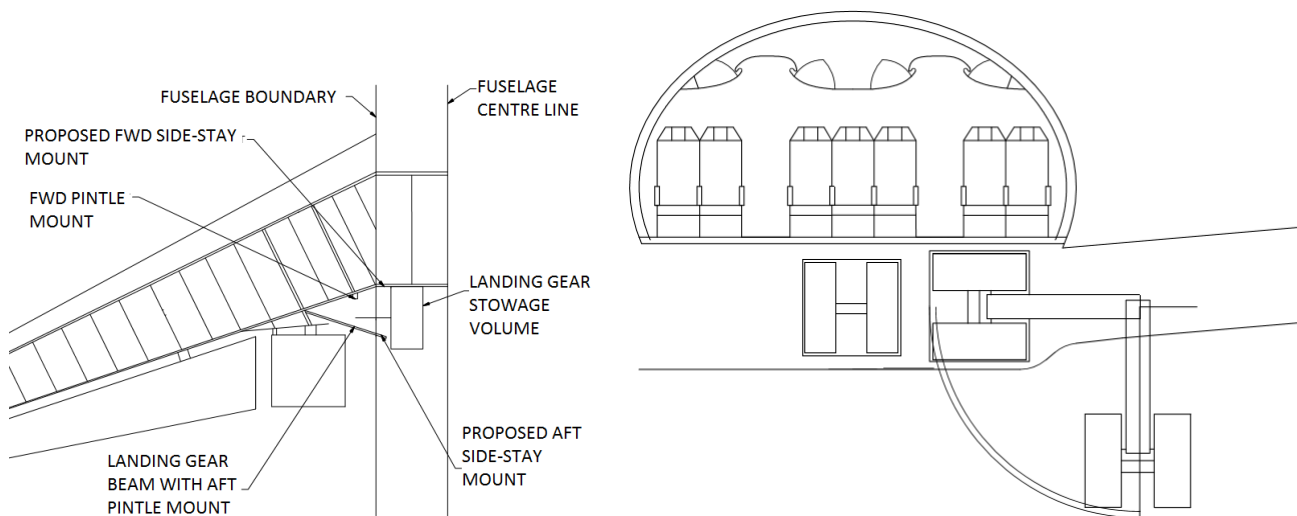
(left): Attachment point of the double side-stay mount, pintle mount, and its landing gear stowage
